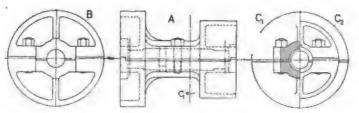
Small Valve Divided Axially, American Engine Company.
